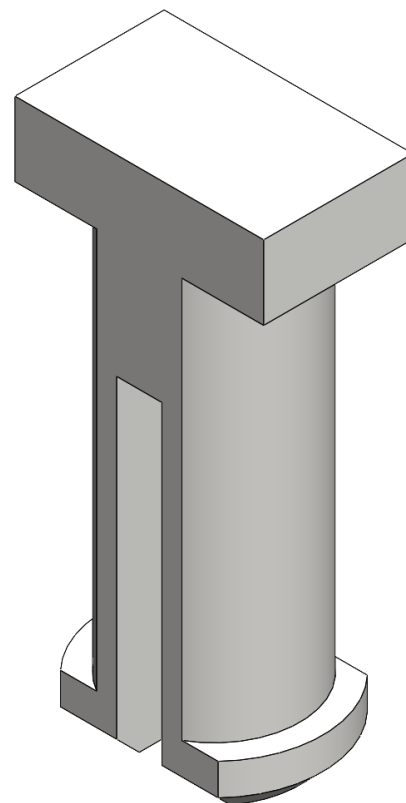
CAD Model of 3D printed clips used to connect together finger joints. Only used for assembly because they are easier to put together compared to screws.
